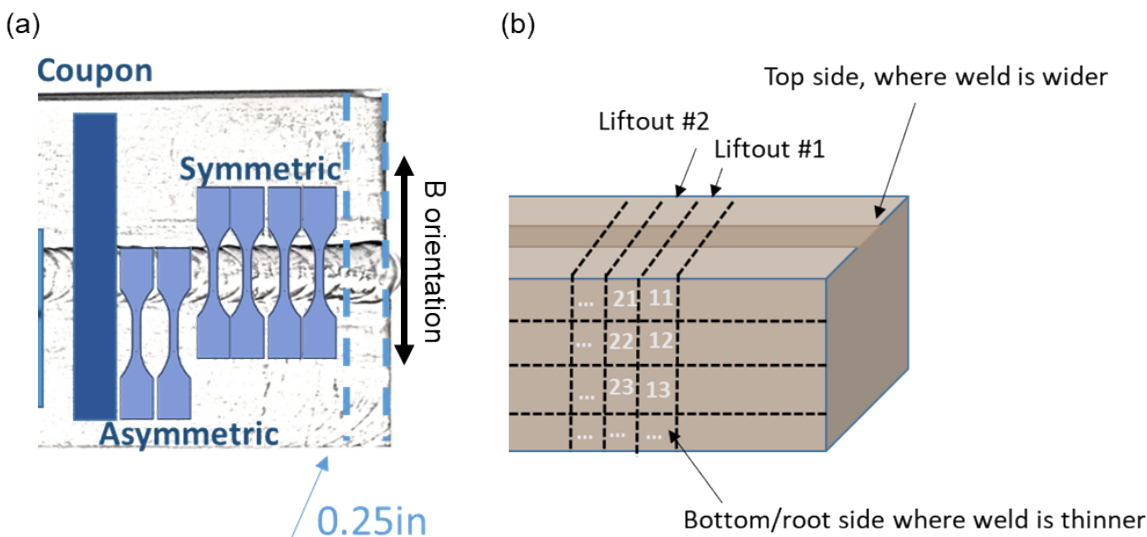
(a) Illustration of how samples were machined relative to the weld seam. The tensile direction of the samples cut from the weld bars matches the “B” orientation of the base metal plates as defined above. A GTAW weld bar geometry is shown but the same layout was used for the FCAW bars. (b) Sample identification numbers included two numeric digits to track the lift out and layer from which the sample was machined. Reproduced from [4].
